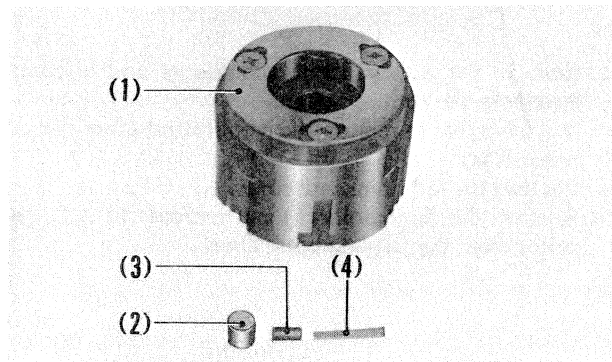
(1) Starting clutch outer (3) Roller cap
